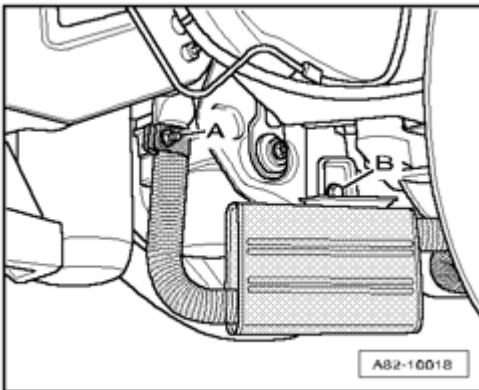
Loosening Nut On Clamp For Corrugated Exhaust Pipe & Removing Bolt & Muffler With Corrugated Exhaust Pipe
